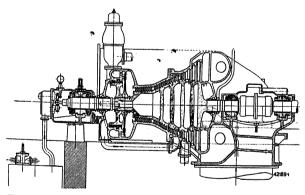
View of the low-pressure housing of a big single-cylinder steam turbine with double-ended low-pressure blading and a common exhaust housing.
